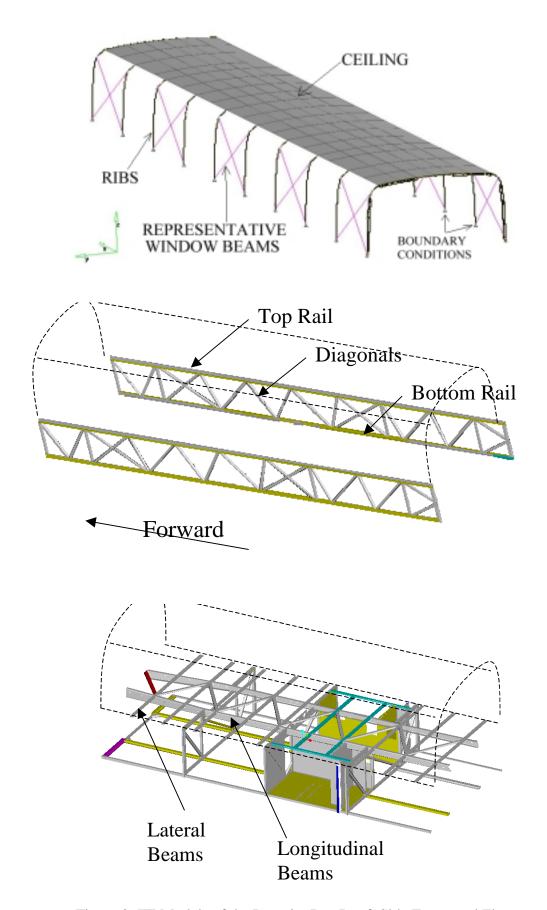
FE Models of the Intercity Bus Roof, Side Truss, and Floor
